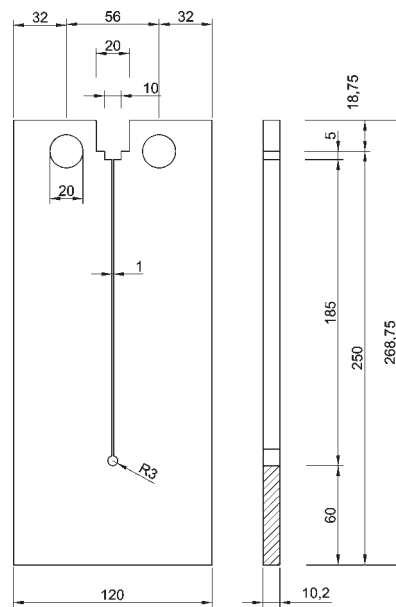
Modified CT Specimen (dimensions in mm) used for laboratory LMAC tests at RWTH Aachen University
